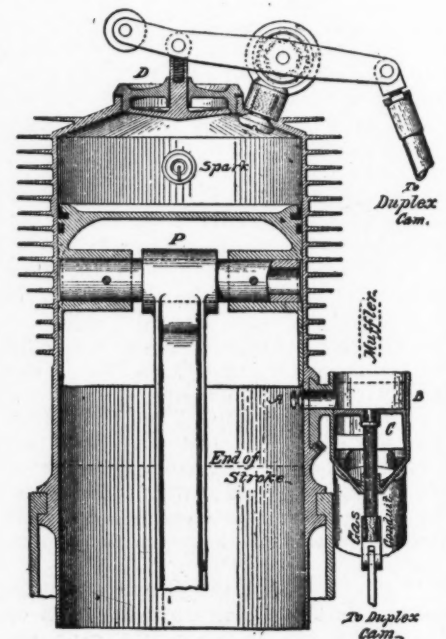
Cross section of one cylinder of the Gyro rotary engine, showing means of intake and exhaust
